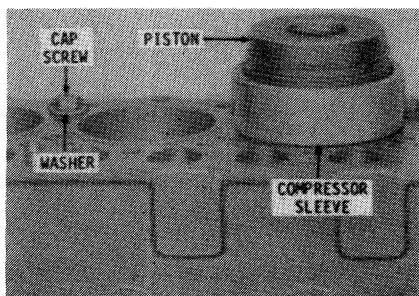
When cylinder head is removed, secure sleeves in cylinder block using short cap screws and flat washers.
